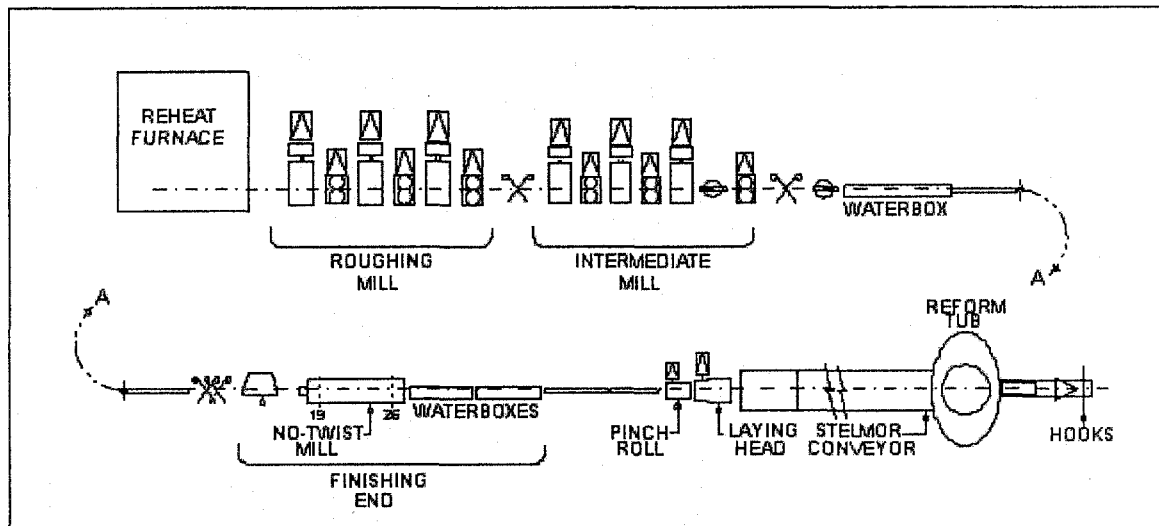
Equipment Layout in a High Speed Rod Mill
